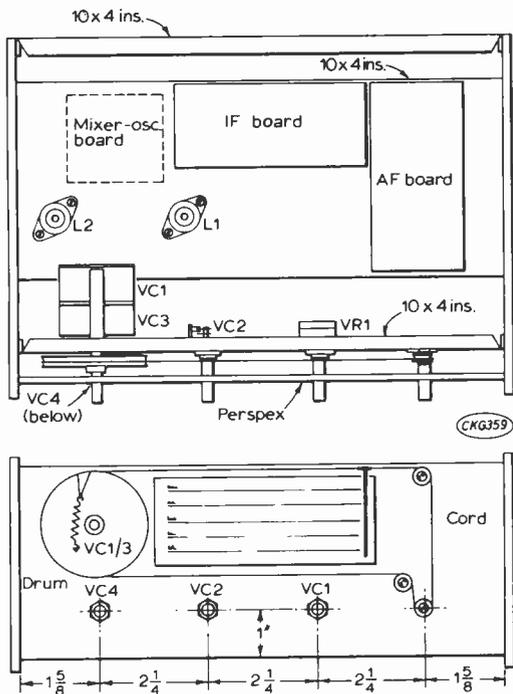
Positioning of the major components on the chassis and front panel with details of the dial drive mechanism.
